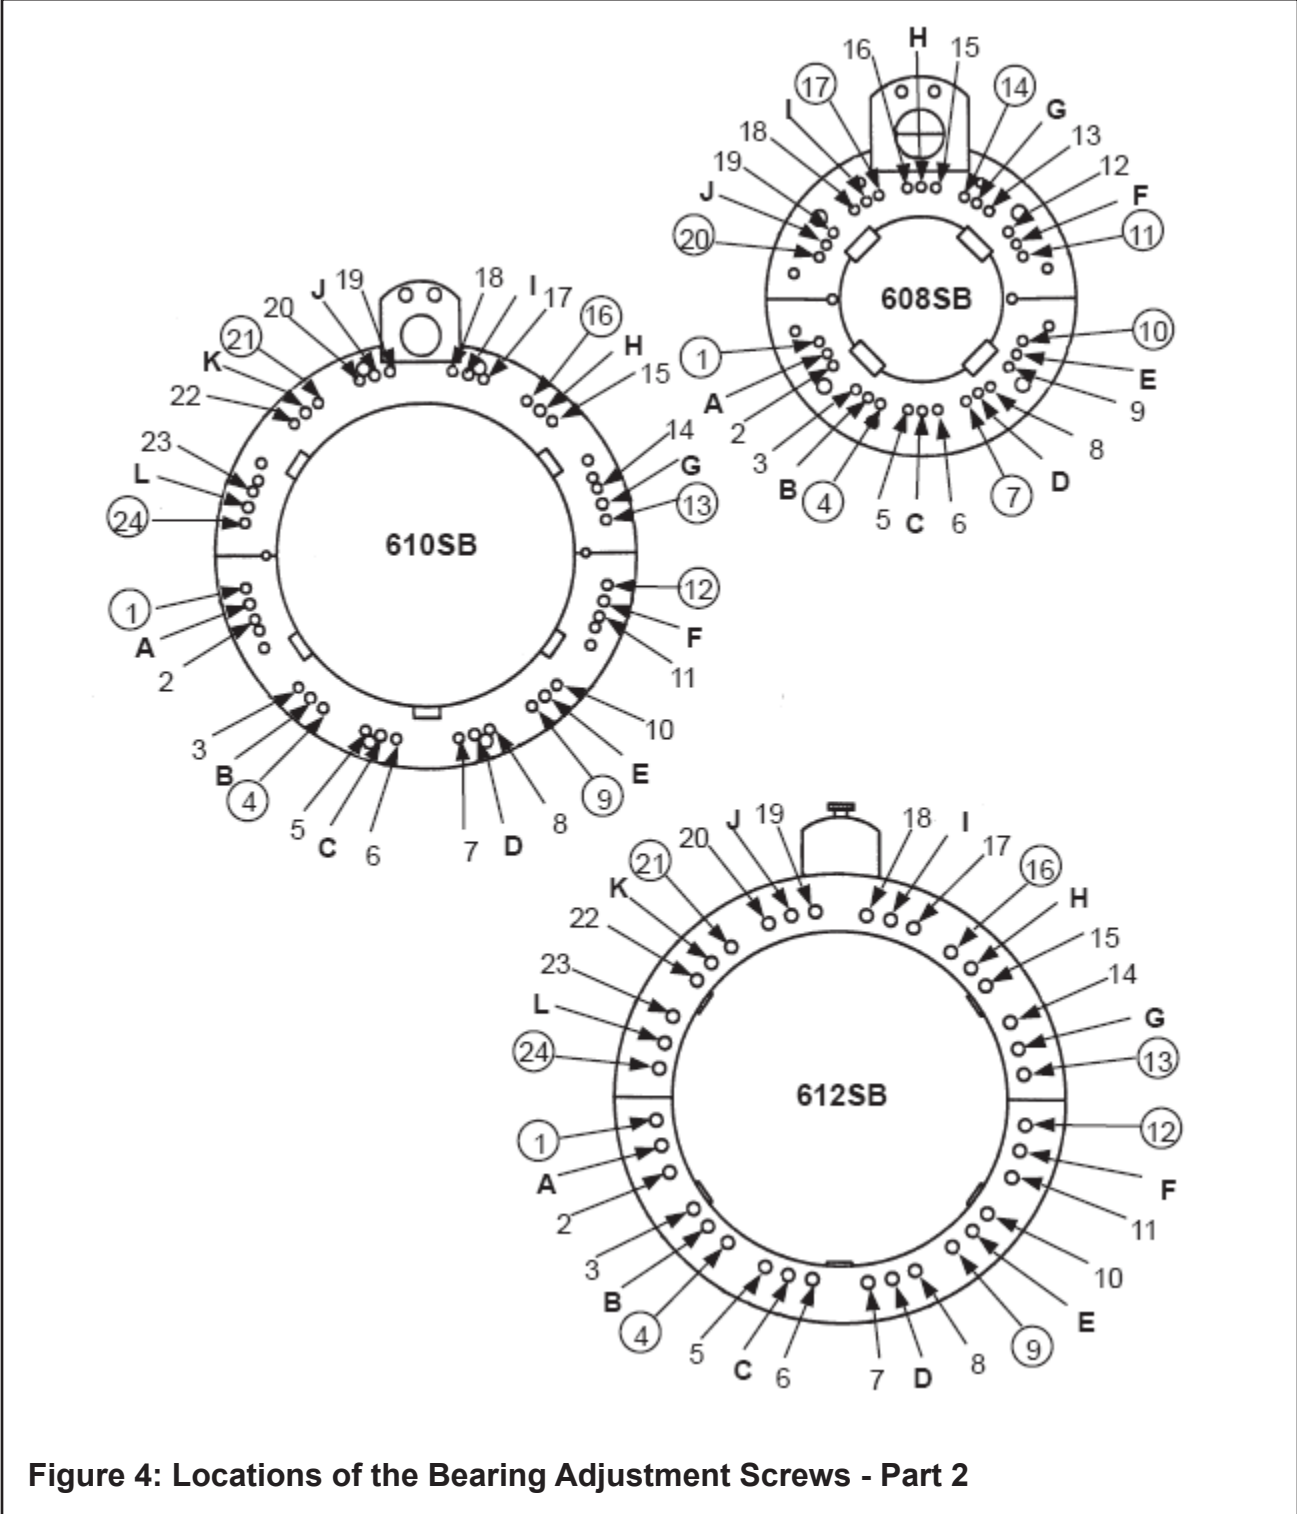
Locations of the Bearing Adjustment Screws - Part 2
